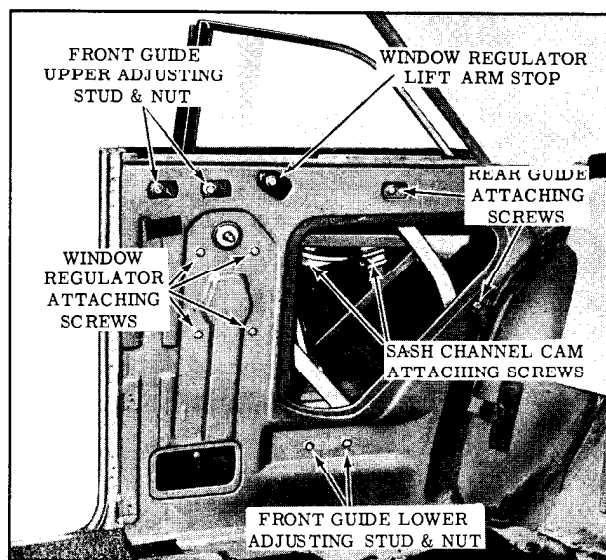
Rear Quarter Hardware ("47" Style)
